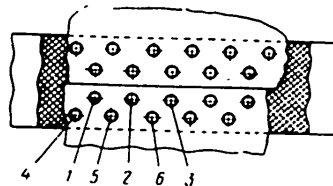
Riveting Sequence for Double-Row Butt Seam with Pneumatic Hammer
